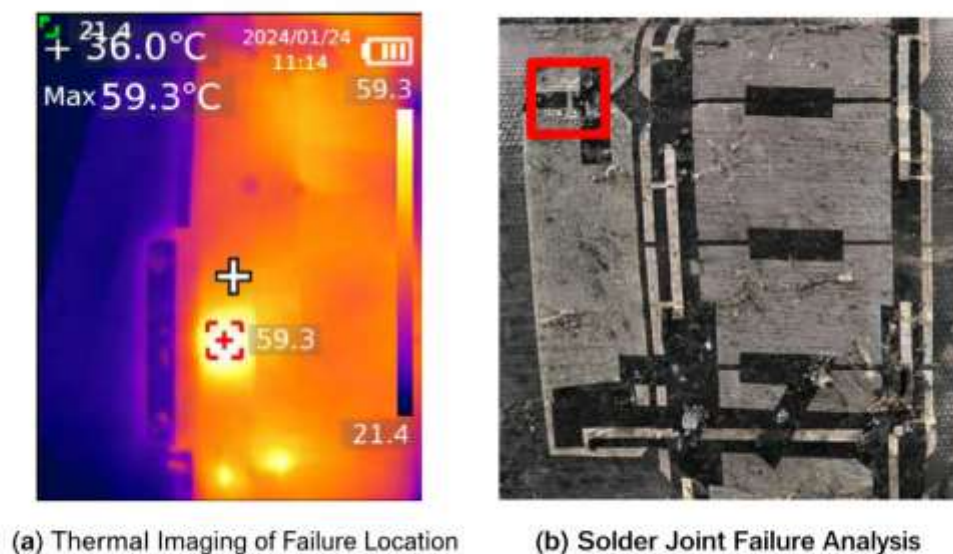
Infrared thermal imaging (a) and post-failure inspection (b) of a back-contact photovoltaic module interconnect. The thermal image identifies a localized electrical hotspot caused by increased resistance at a fractured solder joint. Physical inspection confirms interconnect fatigue at the corresponding location, illustrating a common failure mechanism in mobile solar applications.
